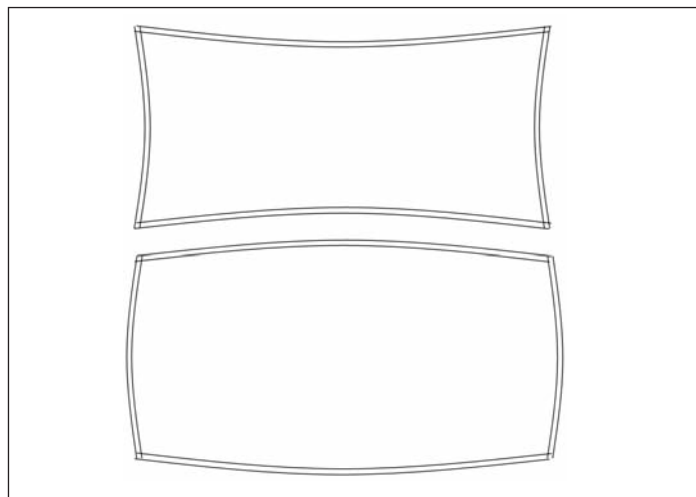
Frames distorted outwards or inwards after welding
